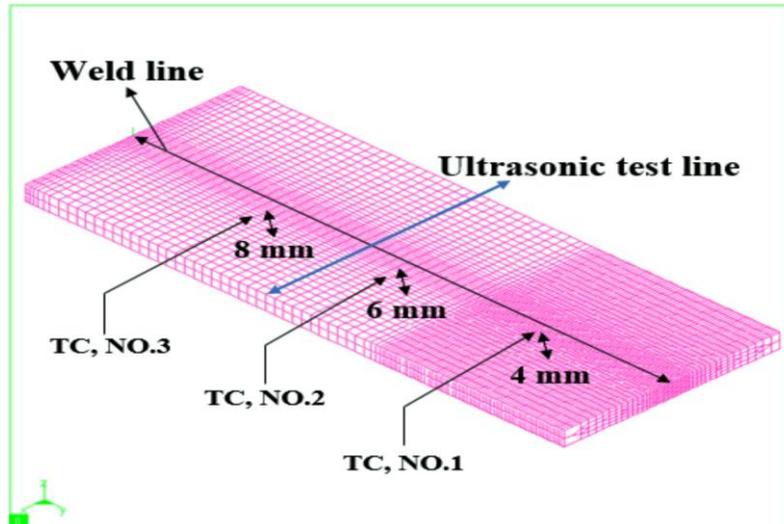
Schematic location of thermocouples (TC) in the path of welding and trajectory of conducting ultrasonic testing.
